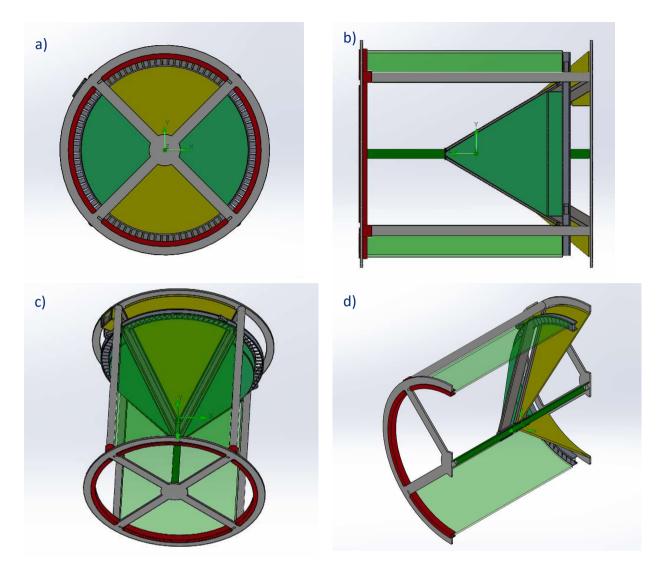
Version 4 of the prototype in release position: a) Front view b) side view: c) 3D view d) 3D isometric section view
